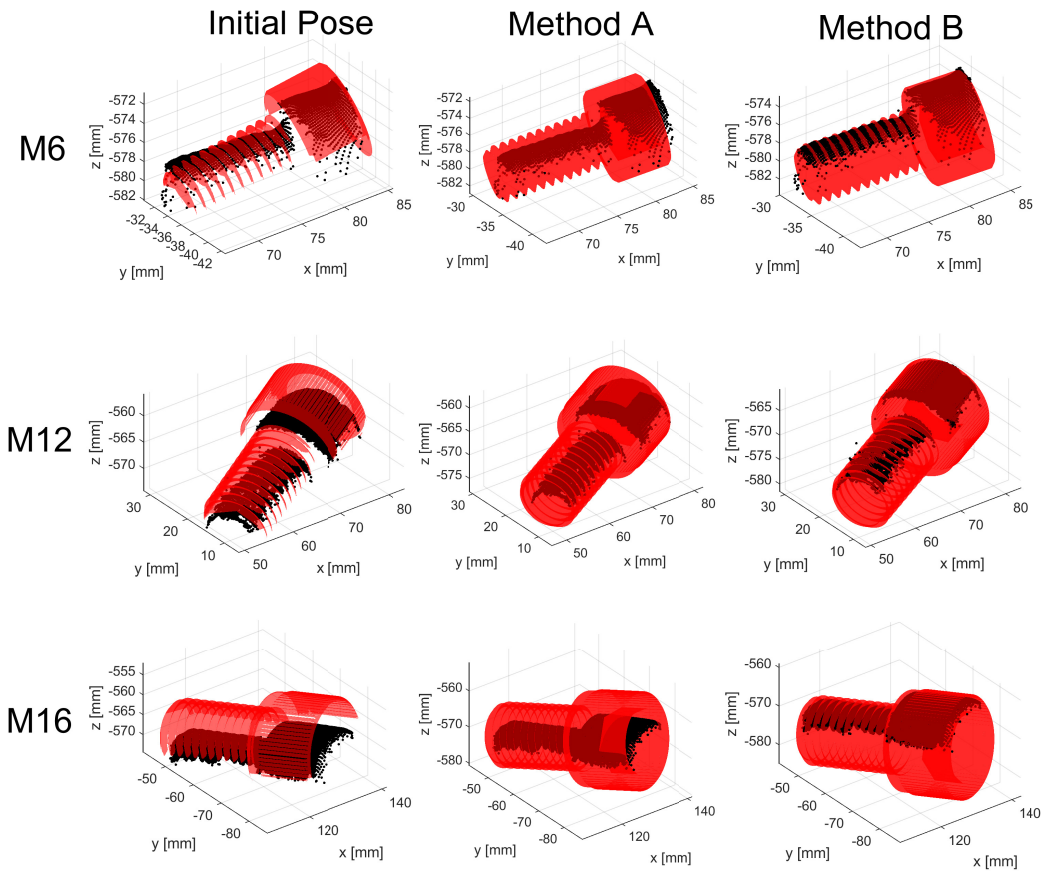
Examples of CAD (red) and segmented 3D point clouds (black) for three screw sizes: M6, M12 and M16 (top to bottom). Left to right column: visible only part of CAD in the initial pose used by ICP; final CAD alignment using Method A; final CAD alignment using Method B. The right column shows clearly better alignment of CAD with 3D data than the results in the middle column.
